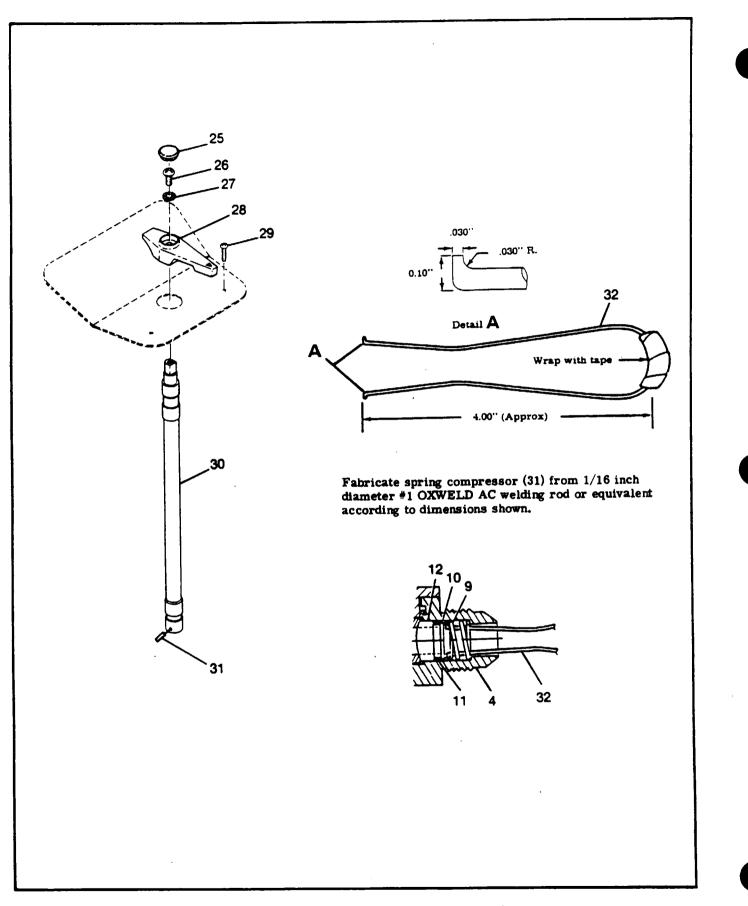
Fuel Selector Valve (Sheet 2 of 2)
